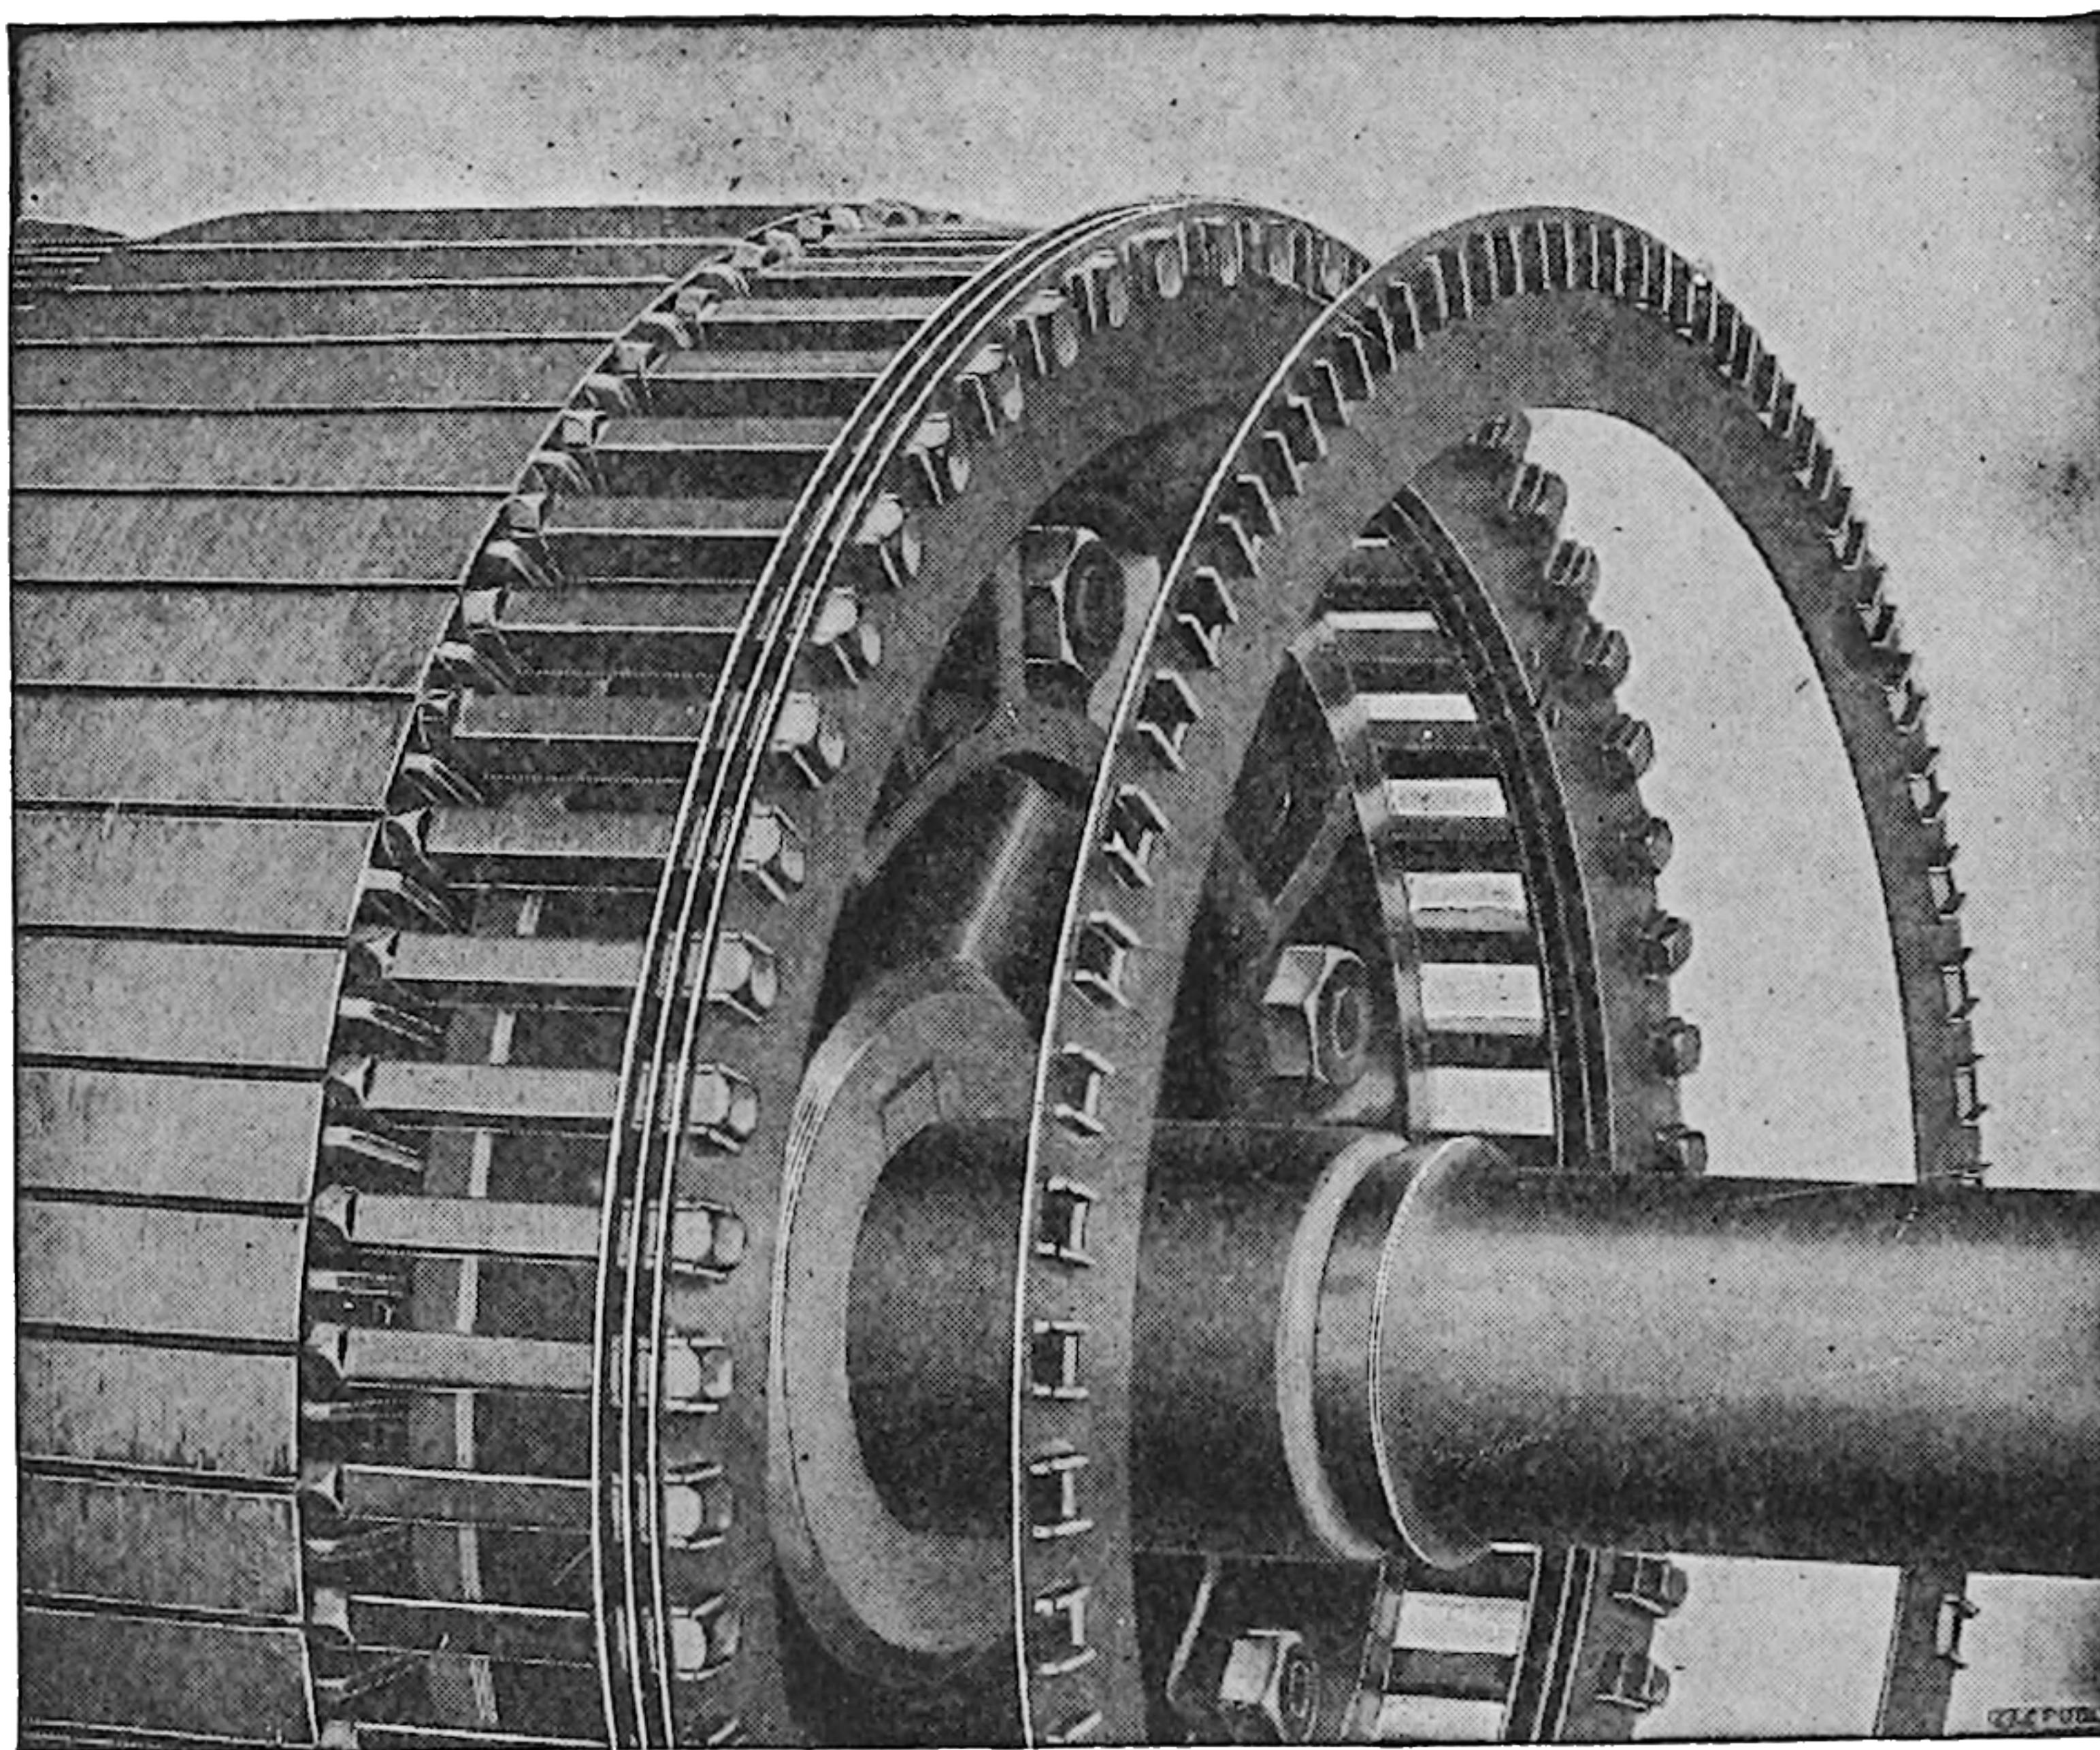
Soldered Form of End-Ring Construction for Form K Rotor
